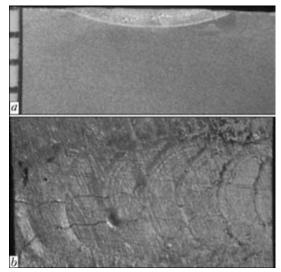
Example of hot cracking: a - weld cross-section; b - from top view
